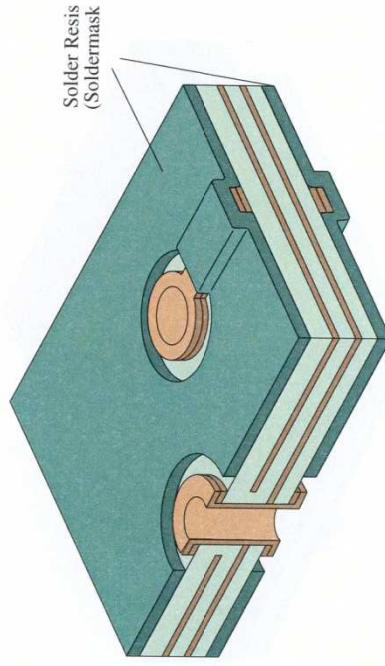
Apply solder resist. The specified resist (either dry film, liquid photoimageable, or screen printed) is applied to the surfaces of the PCB or panel.
